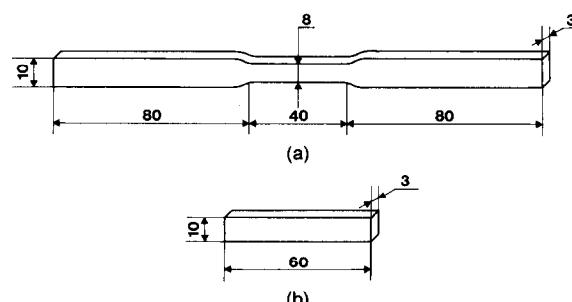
Geometry and dimensions, in mm, of the (a) tensile and (b) bending specimens.
